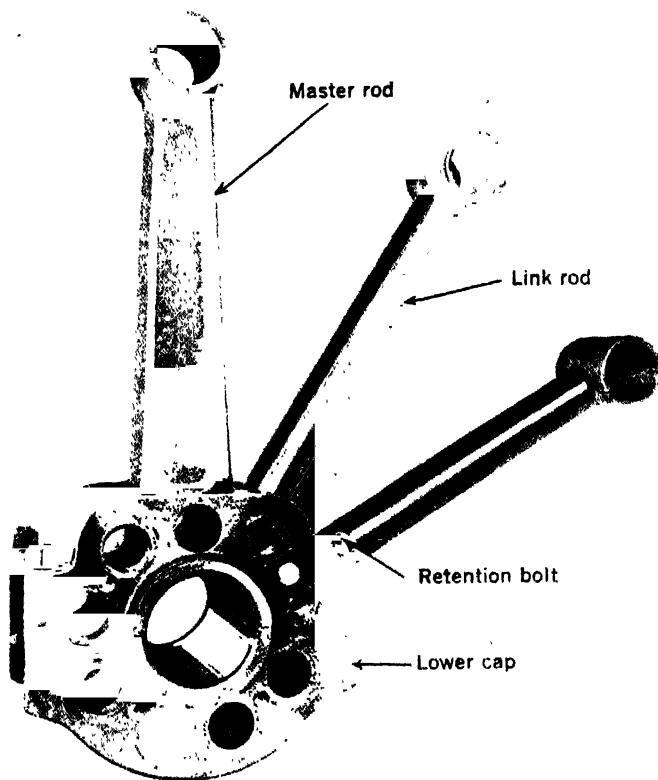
Master Connecting Rod and Link Rods Showing Method of Locking Knuckle Pins in Place in J5 Engine.
